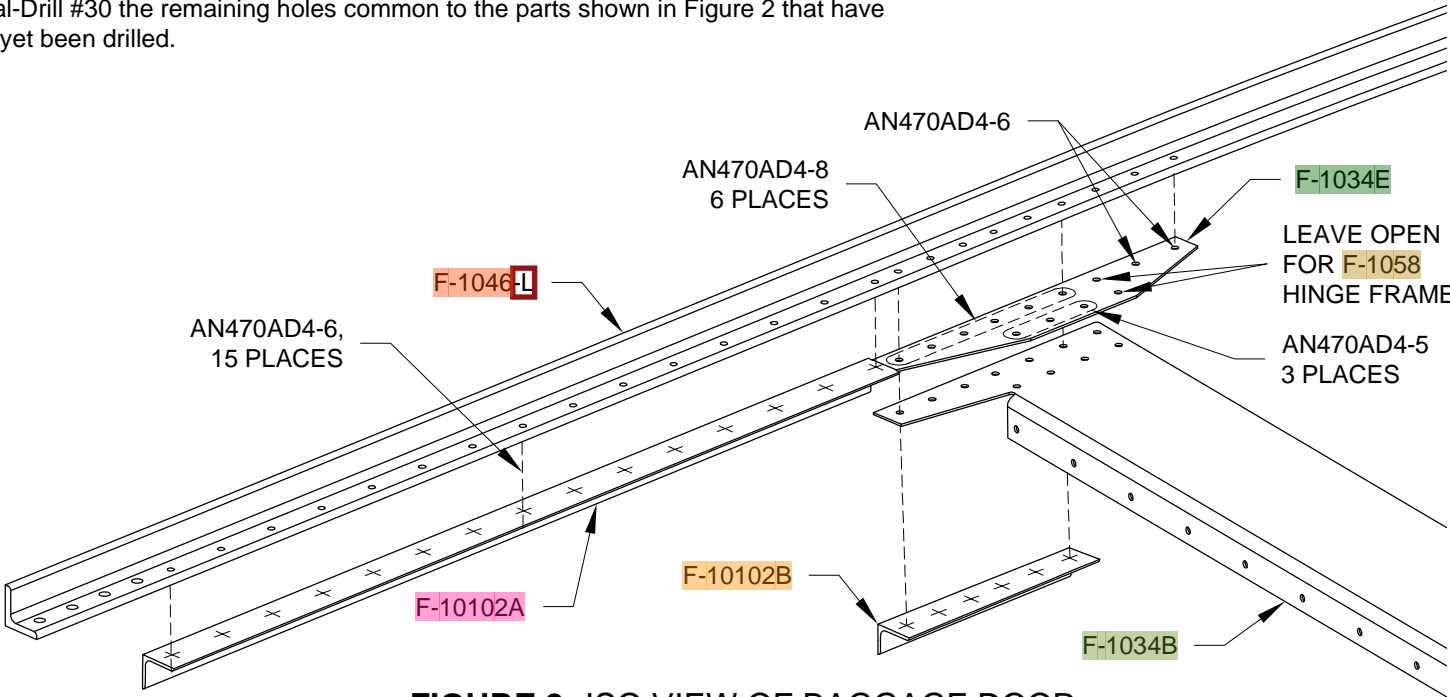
ISO VIEW OF BAGGAGE DOOR SEAL ANGLE INSTALL
